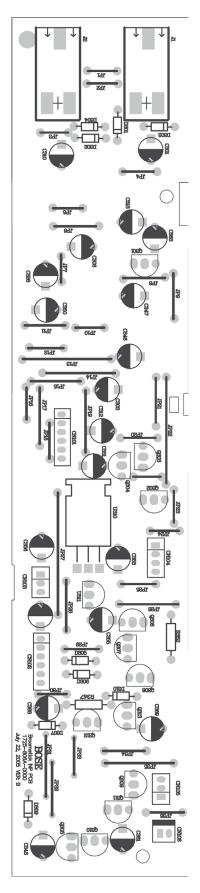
Input/Limiter PCB (Non-RoHS) Top Side Etch Layout
